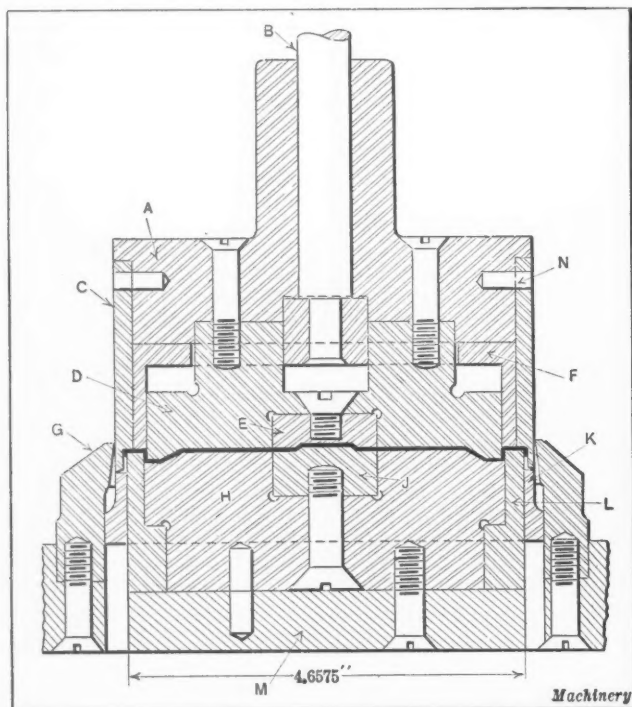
Die for blanking and forming Bottom End of Coffee Can
